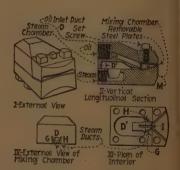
Details of tip of insidemixing steam-atomizing oil burner.
